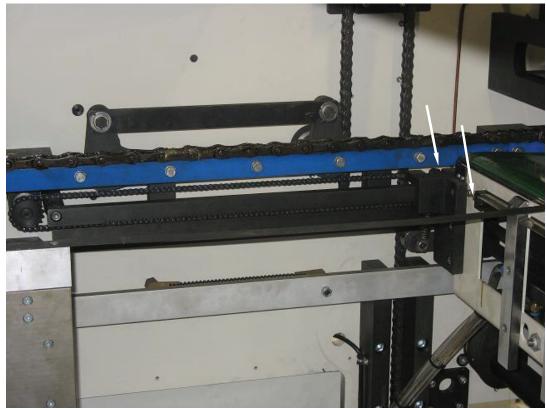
Delivery section backstop (symmetrical), oil filling type: B
